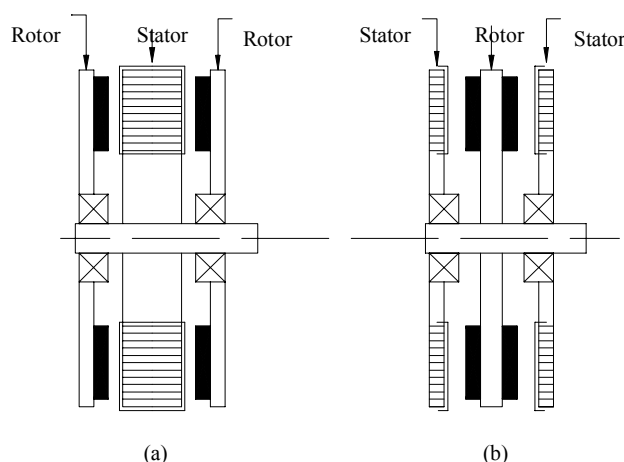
Main topologies of axial flux PM synchronous machines. a) AFPM machine, b) AFIPM machine [2].
